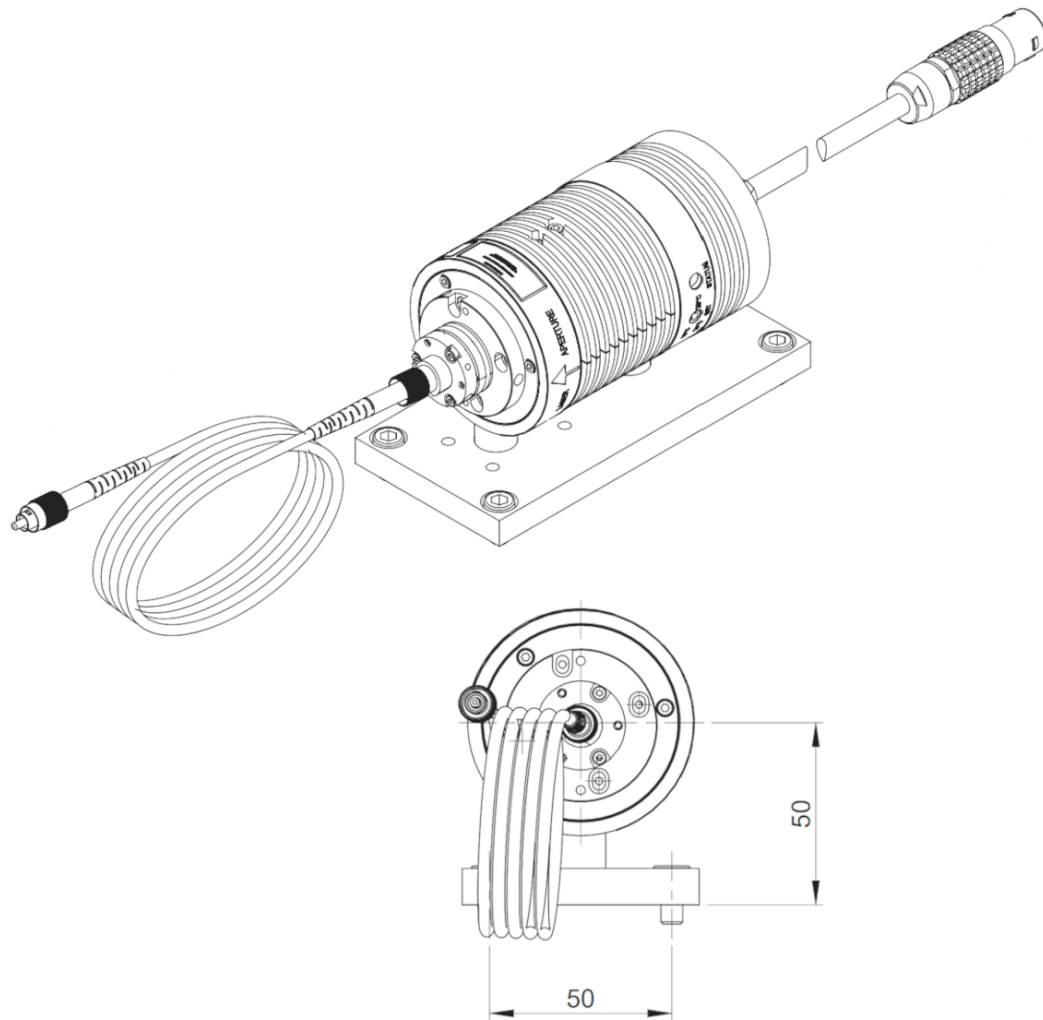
Front view of an LDH laser head with mounting plate and fiber cable
